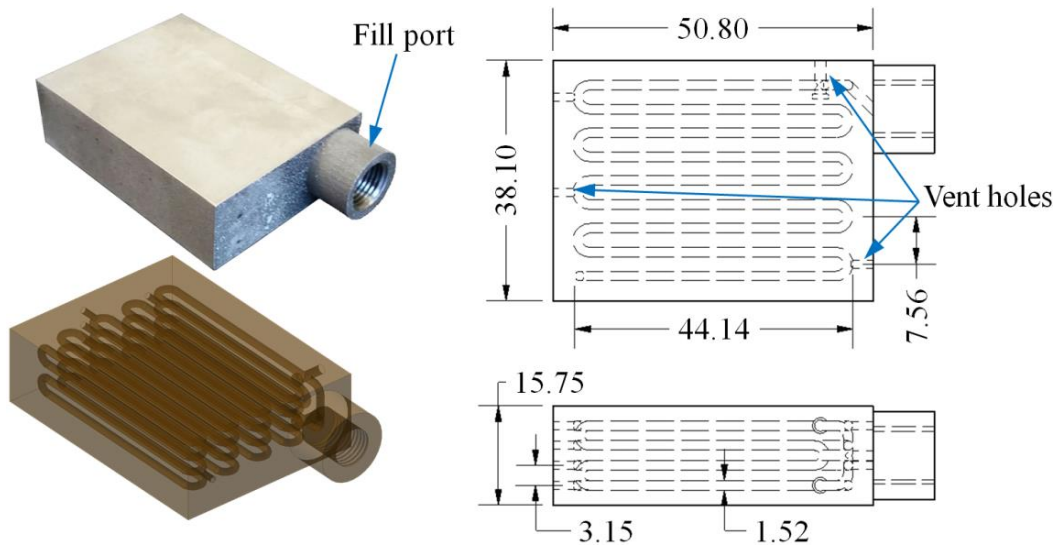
Ti-6Al-4V ML-OHP with fill port and vent holes: (left) photograph after milling of faces with transparent CAD part and (right) dimensioned drawings (in millimeters).
